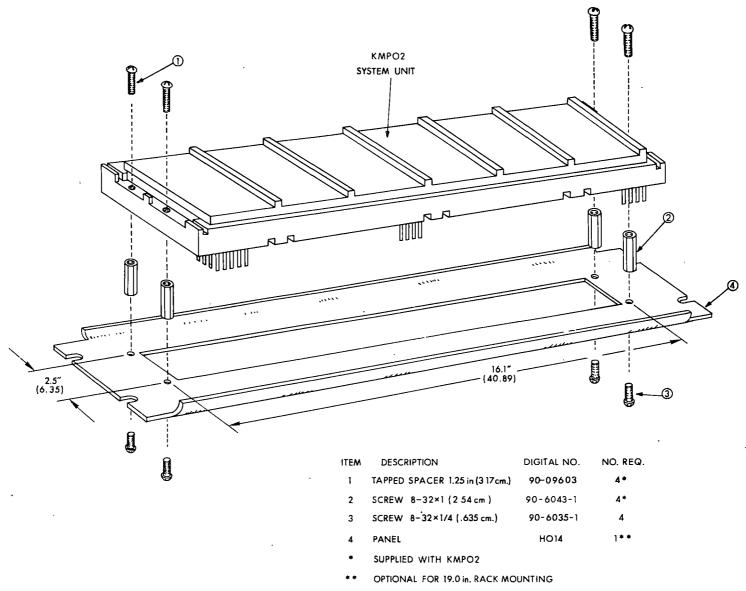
KMP02 Panel Mounting and Hole Dimensions
